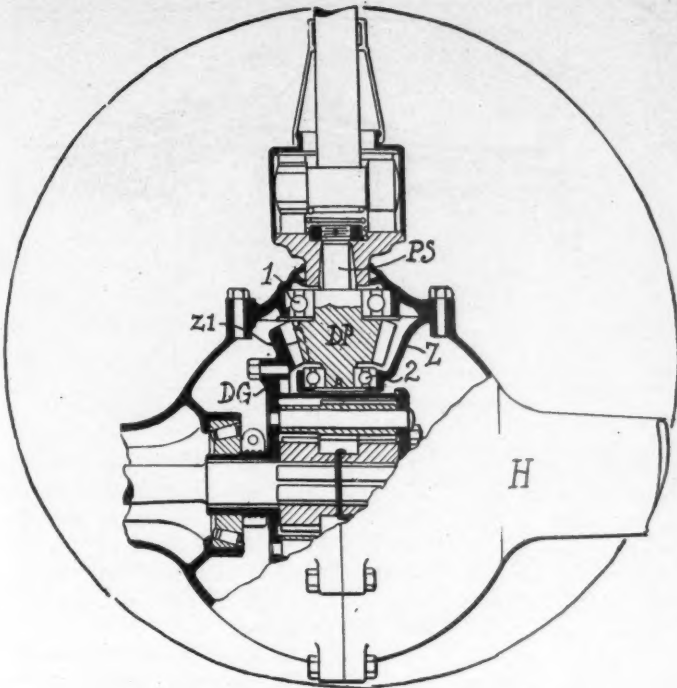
PREMIER DOUBLE BEARING FOR PINION
